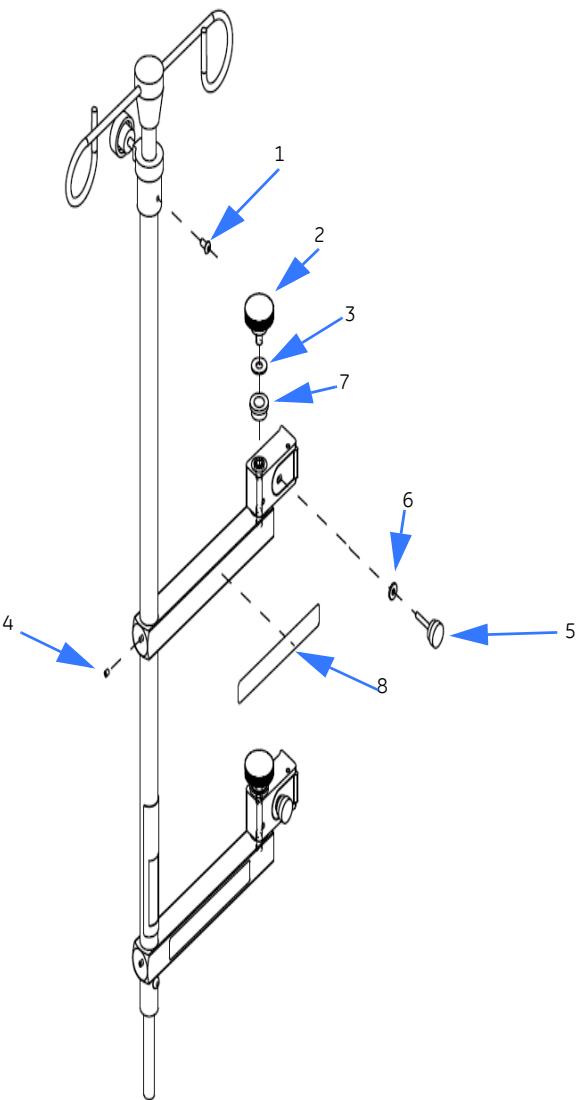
Rotating I.V. Pole Assembly (6600-0851-800)
